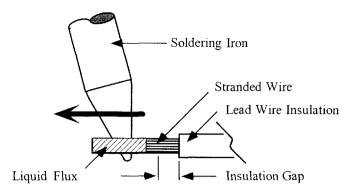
Using the Soldering Iron to Tin Insulated Leads.
